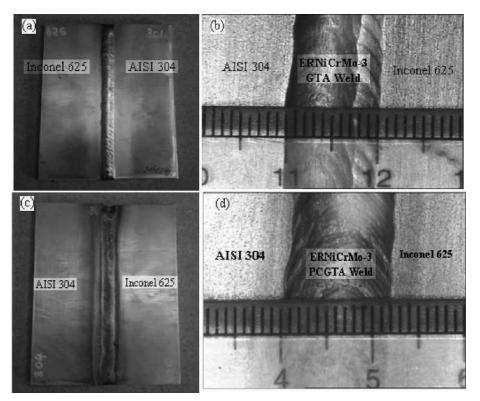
(a) GTA weldments of AISI 304 and Inconel 625 (b) Macrograph of the dissimilar GTAW joints (c) PCGTA weldments of AISI 304 and Inconel 625 (d) Macrograph of the dissimilar PCGTAW joints.
